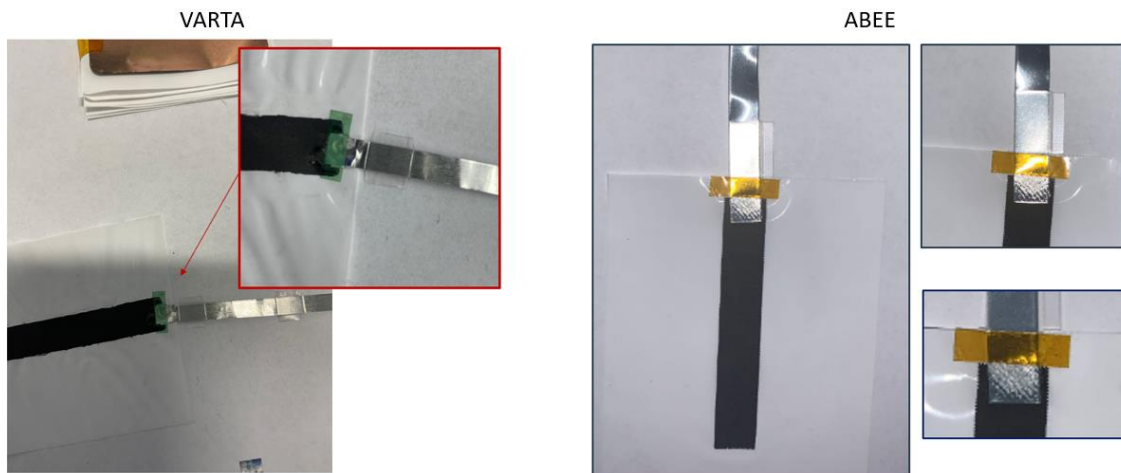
Ultrasonic welding of Al tab on the coated separator at VAR (left) and at ABEE (right)
